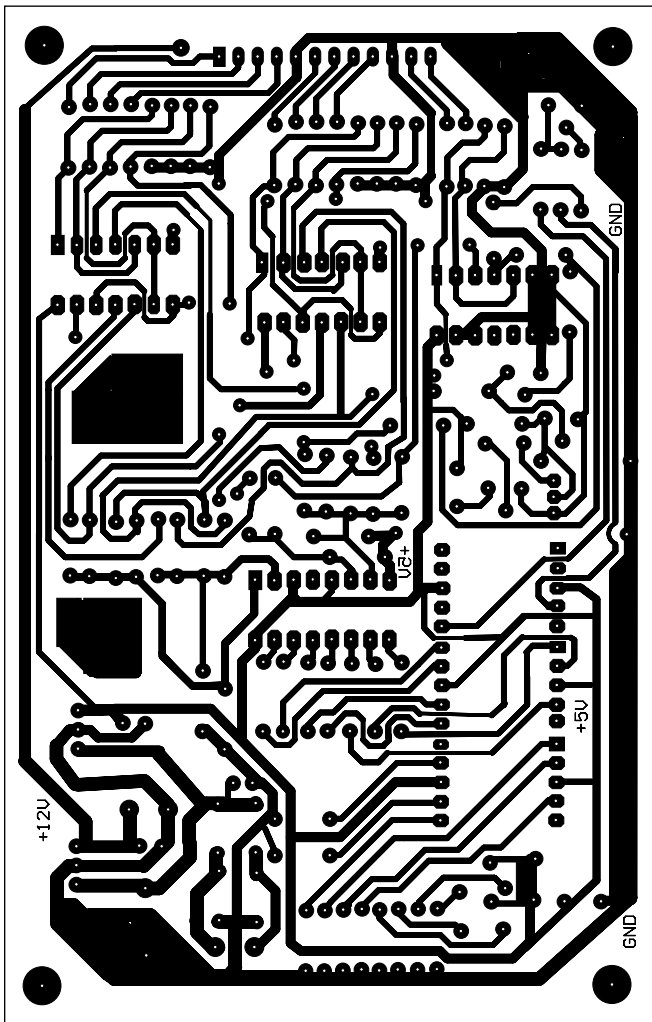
Actual-size, single-sided PCB for the unique liquid level indicator
